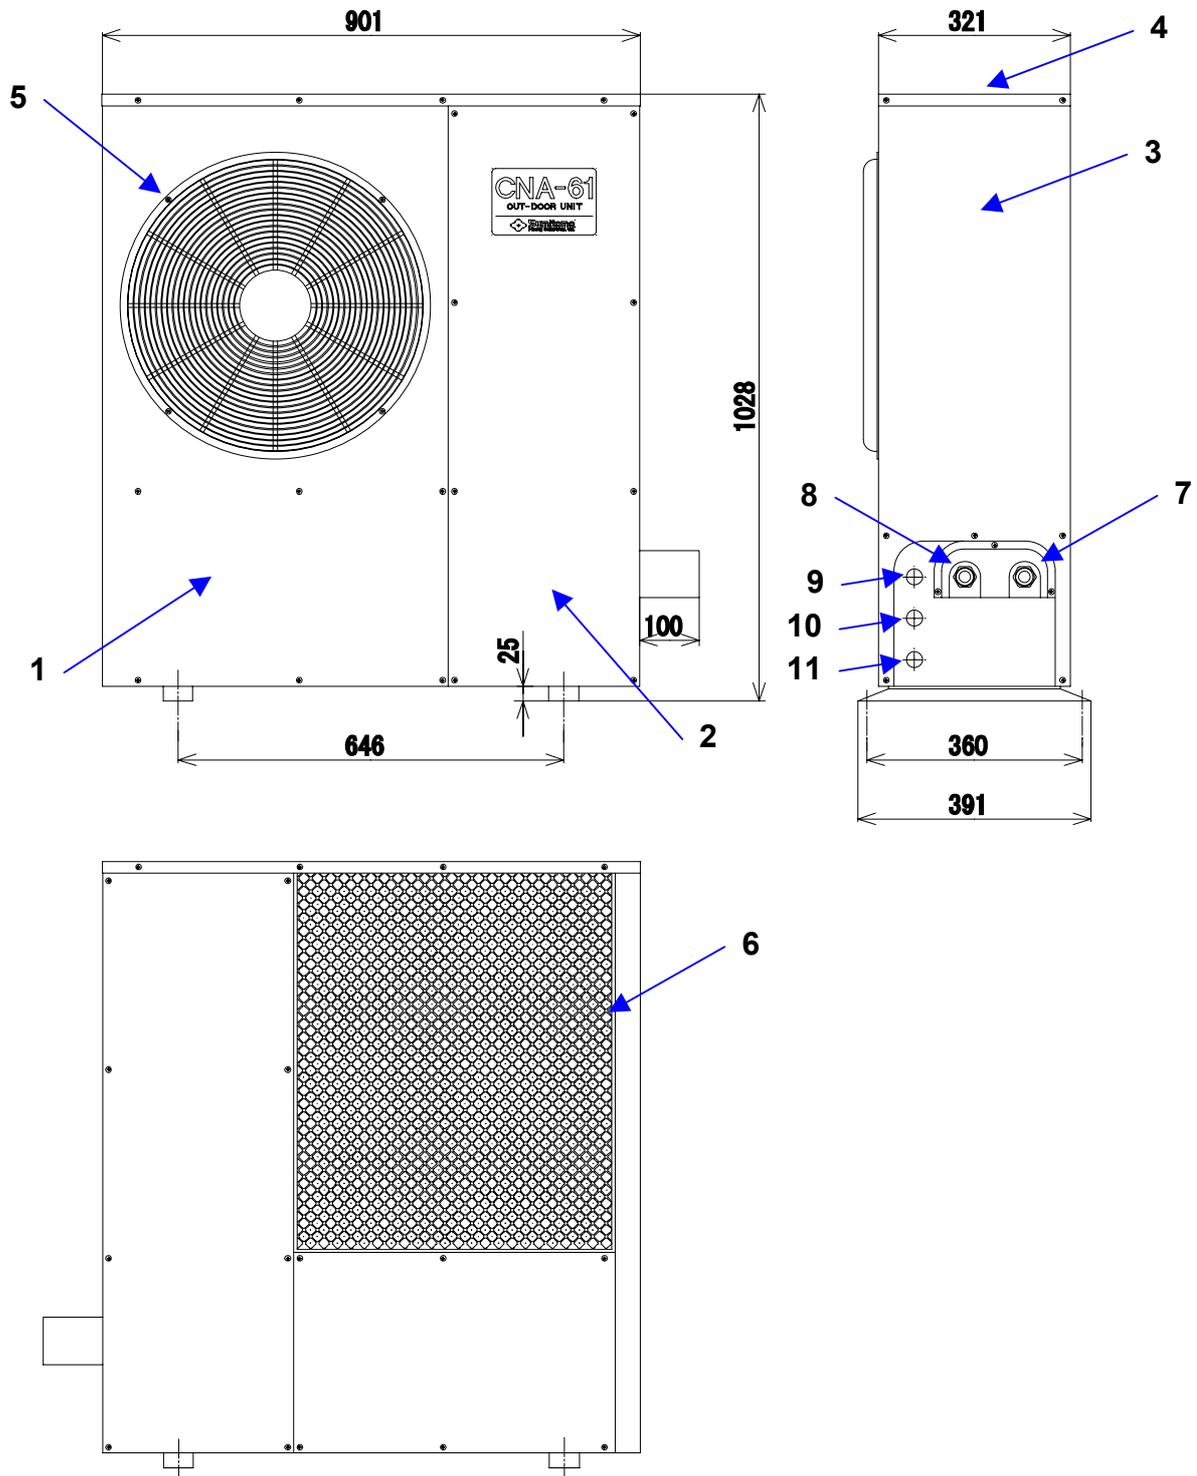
EXTERIOR PARTS FOR CNA-61D-C
